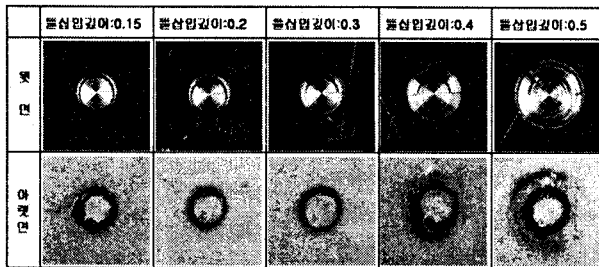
External shape after friction stir spot welding with pin insertion depth
